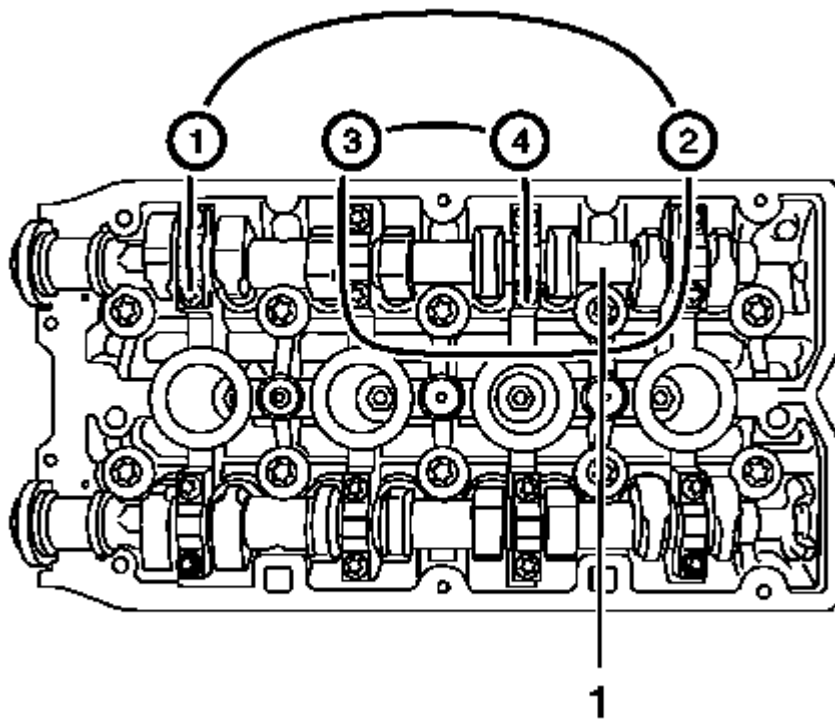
Intake Camshaft Bearing Cap Bolts Loosening Sequence
